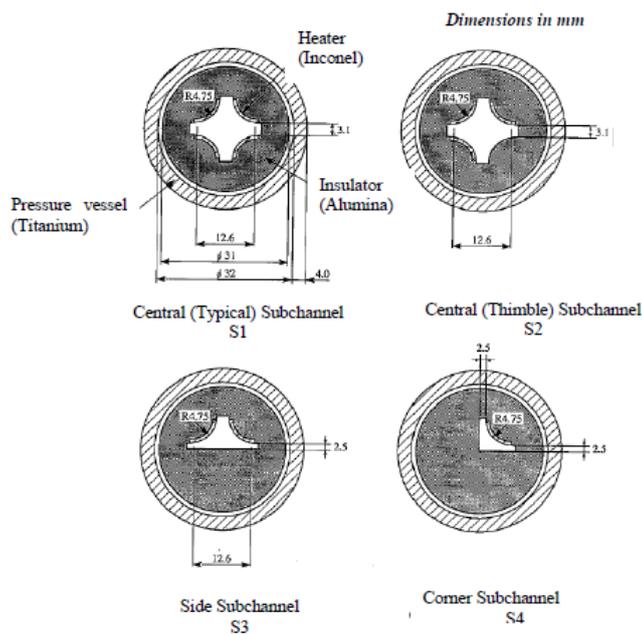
Cross-sectional View of Subchannel Test Assembly [3]
